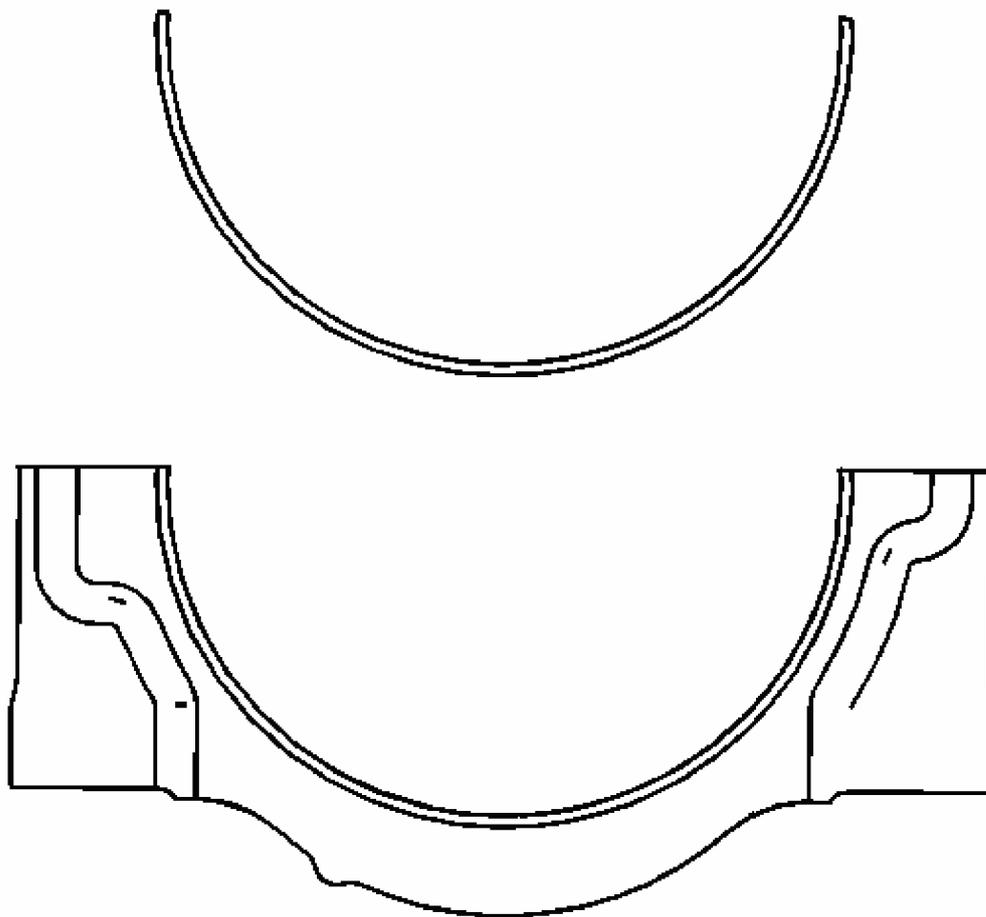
View Of Lower Connecting Rod Cap And Bearing
